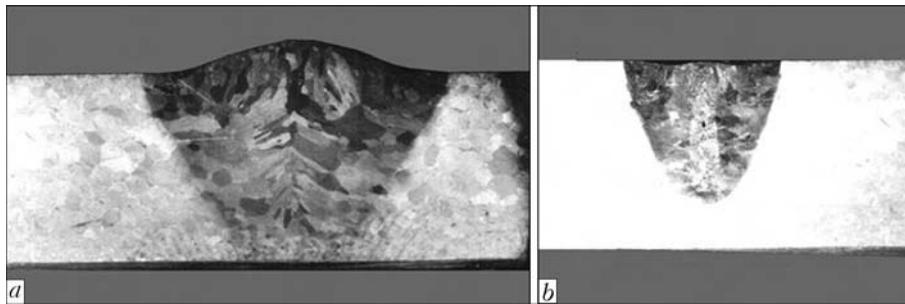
Macrostructures of welds on titanium alloy T110 ( $\delta = 13$  mm): *a* – laser-arc welding; *b* – laser welding
